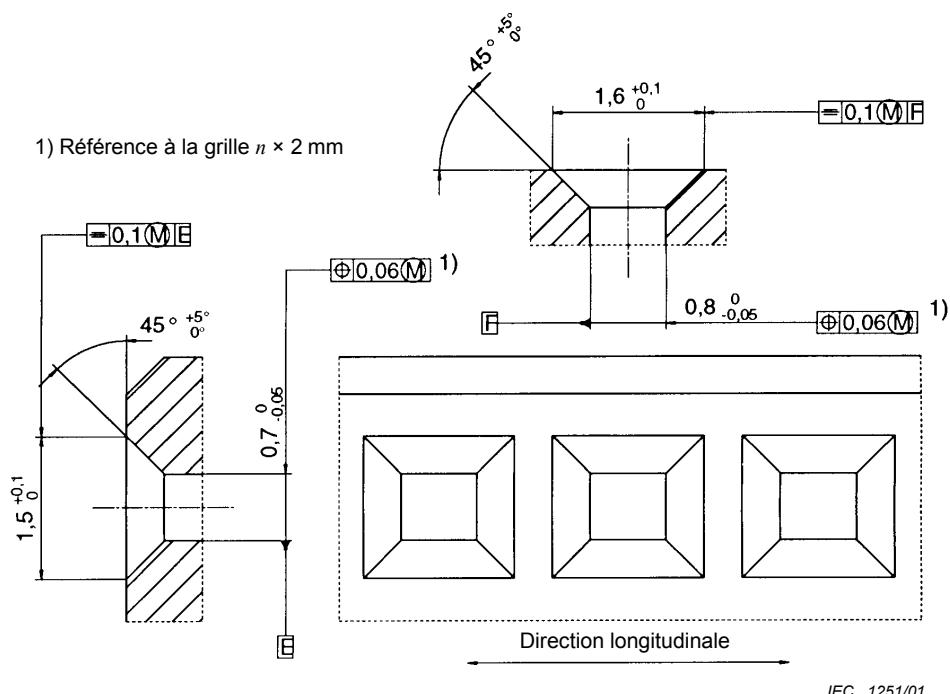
Dimensions of style N, free 25 mm extension module with three special contacts
